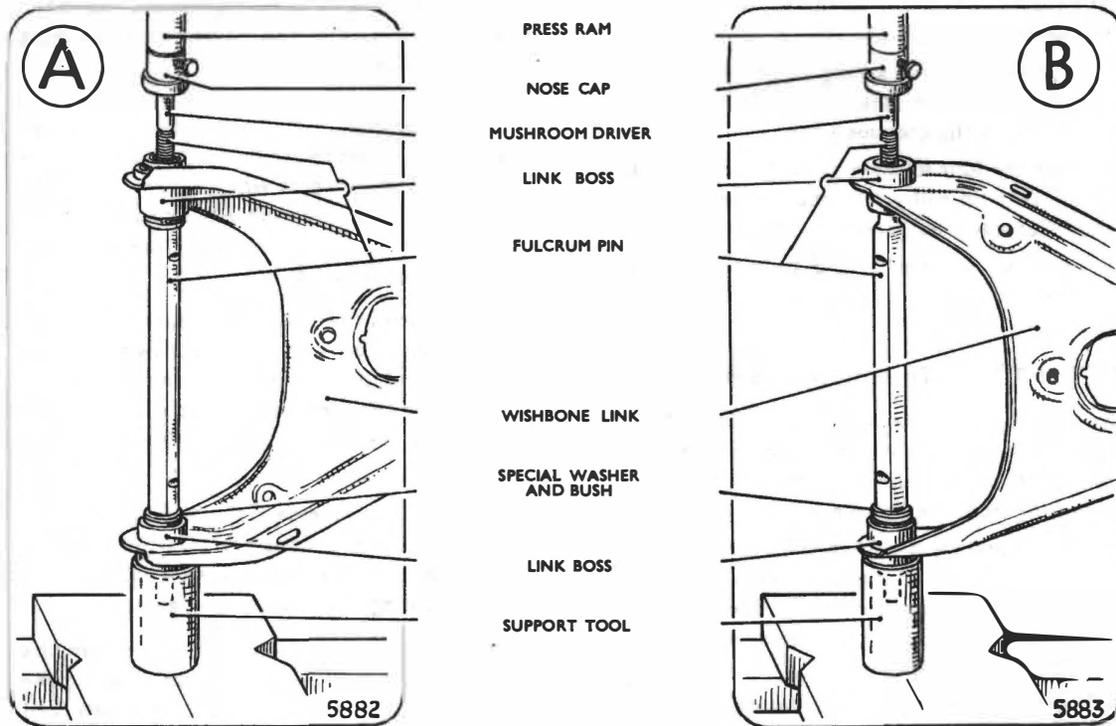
Illustrating method of removing bushes from the links in a workshop press using special tool RG. 318
